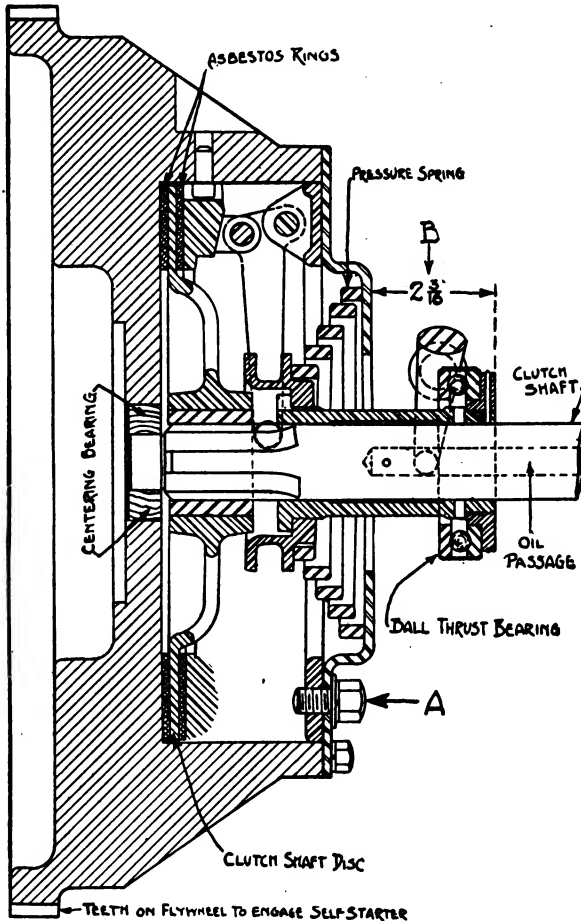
Section of Dry-Plate Clutch As Used on Moline Tractor
